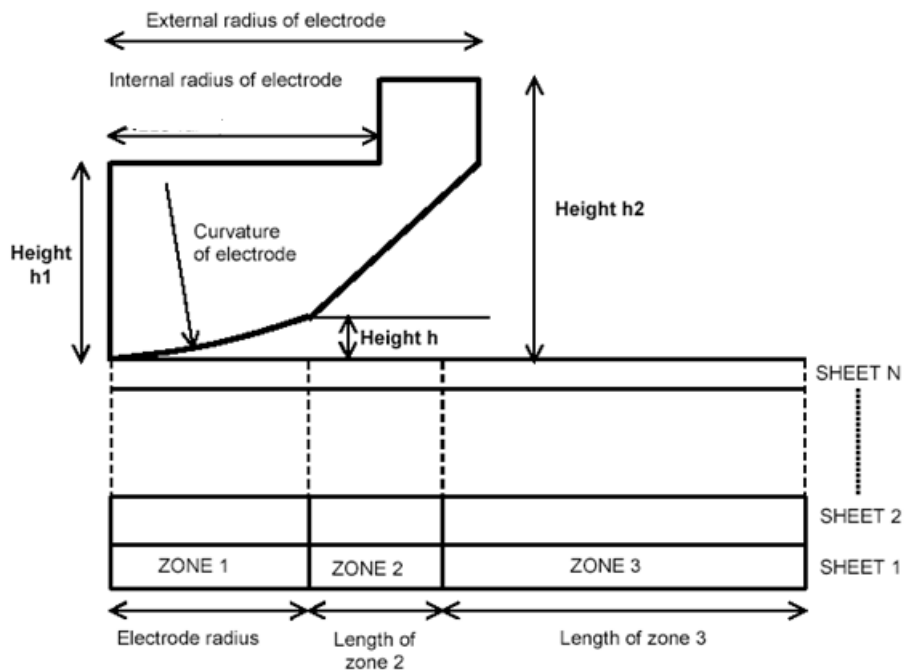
Geometrical definition of spot welding process in Sysweld [ESI, 2009].
